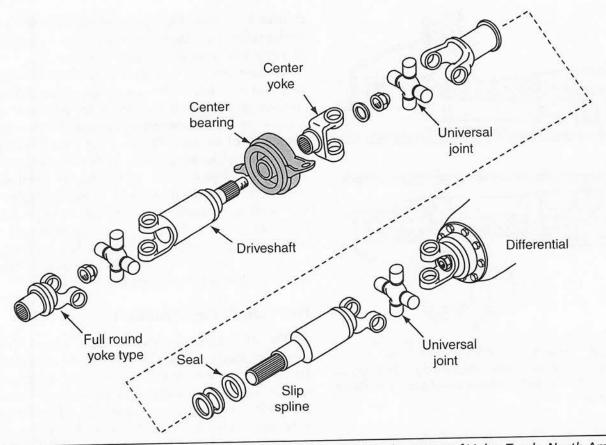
Exploded view of a heavy-duty truck driveshaft assembly. (Courtesy of Volvo Trucks North America, Inc.)
